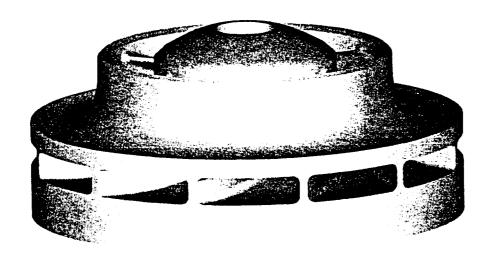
CAD geometry representation of an impeller showing full 360° display and superfluous hardware detail.
